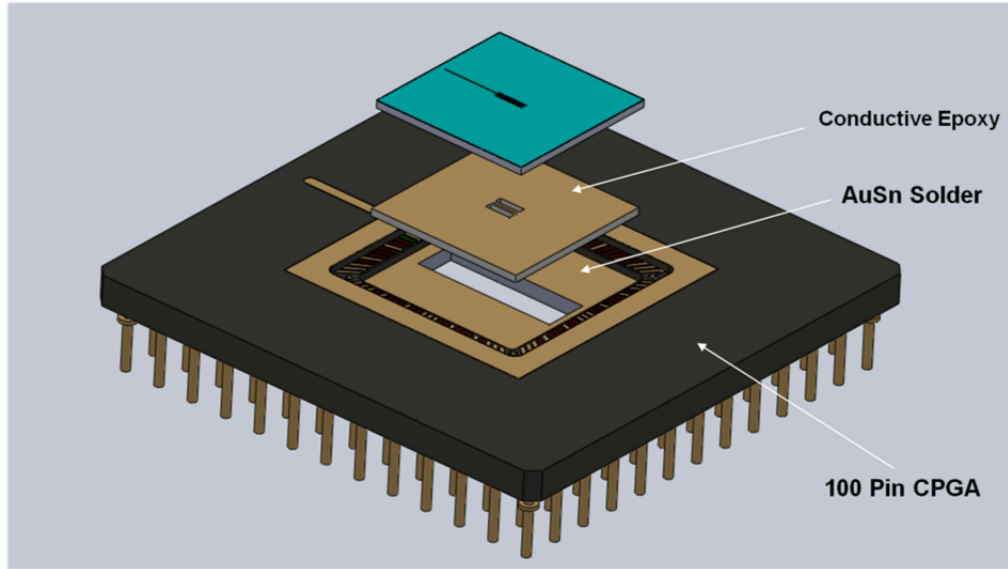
3D model of the trap packaging layers. Trap is epoxy adhered to the masking spacer and spacer is soldered to the carrier.
